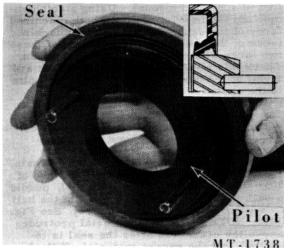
Positioning Crankshaft Rear Oil Seal on SE-1942-2 Pilot
